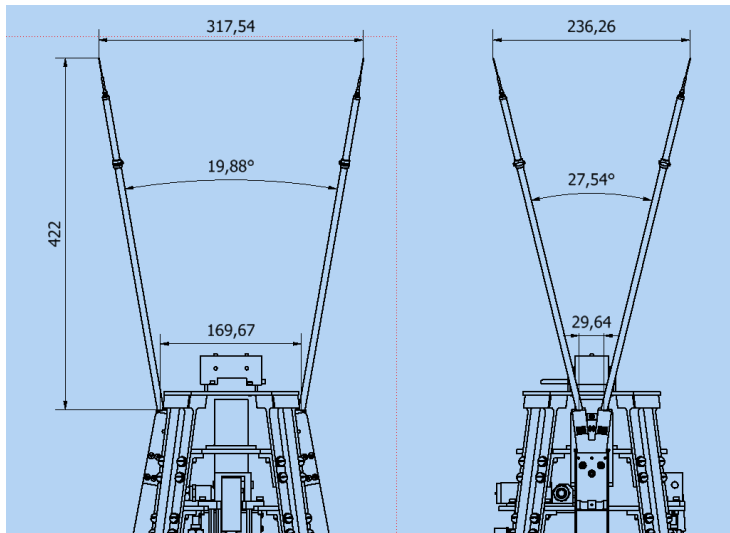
Technical drawing of the mNLP and booms installed on the SS-520-3 rocket. Courtesy of the I-Lab, University of Oslo.
